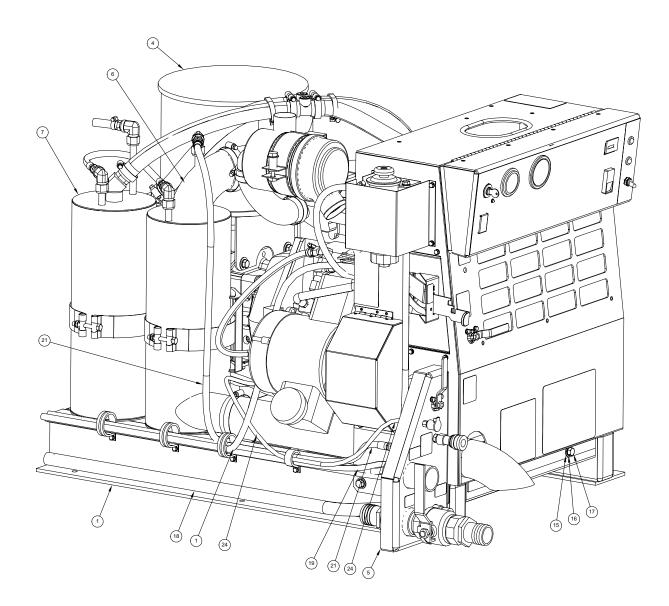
Machine Assembly CTS 450 Diesel - Rear View D-5865 Rev C
